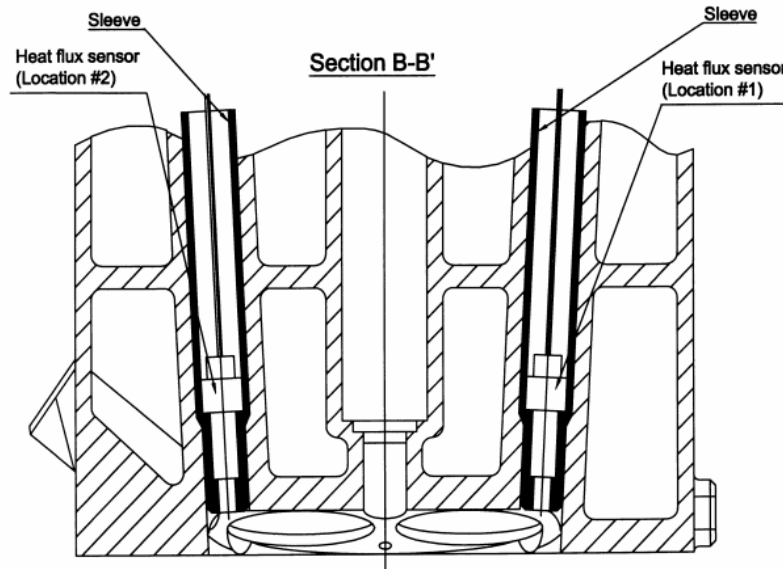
Cross section of head, indicating the mounting locations of the sleeves which hold two fast-response temperature probes flush with the combustion chamber surface
